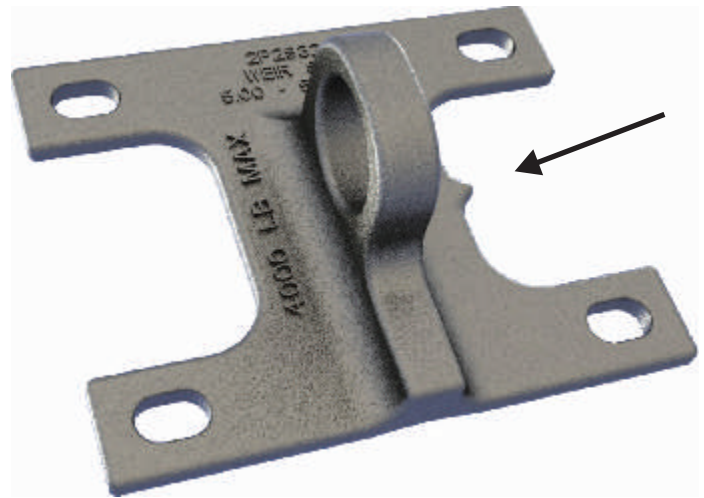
Center arrow feature of clamp used to align the clamp in the center of the pipe assembly.
